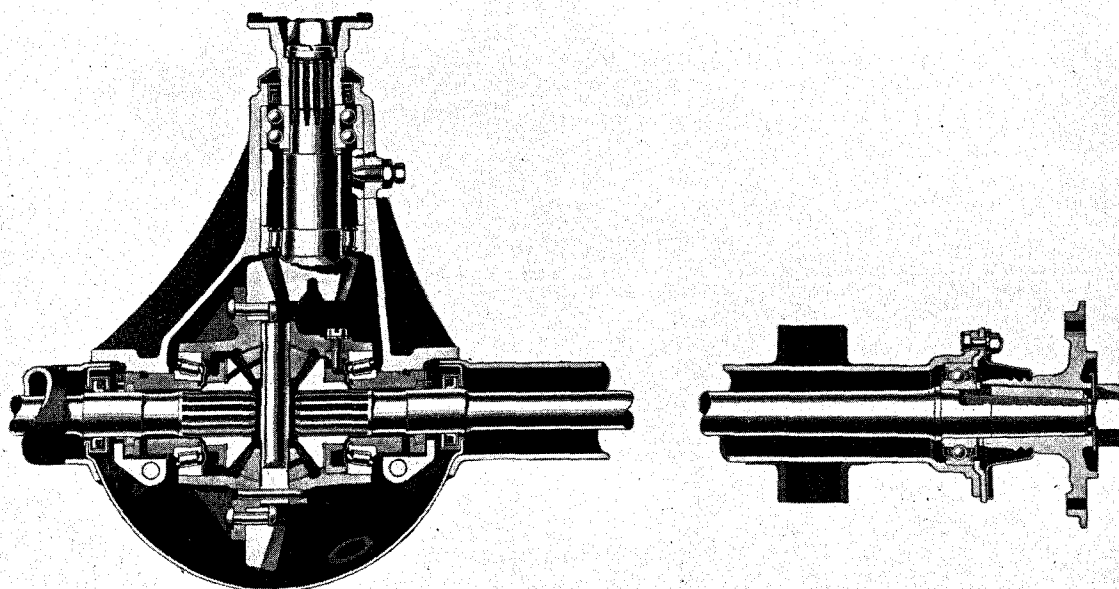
Cross-Sectional View of Spiral Bevel Axle
